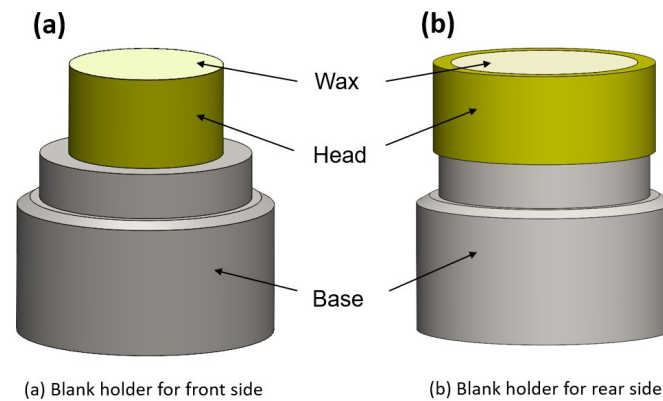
Schematic design and structure of holders for the clamping of IOL blanks for the front and rear side machining.
